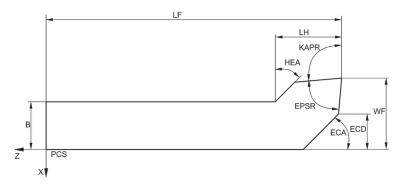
Sketch of turning tool No. 3 and 6 (offset side cutting design)
